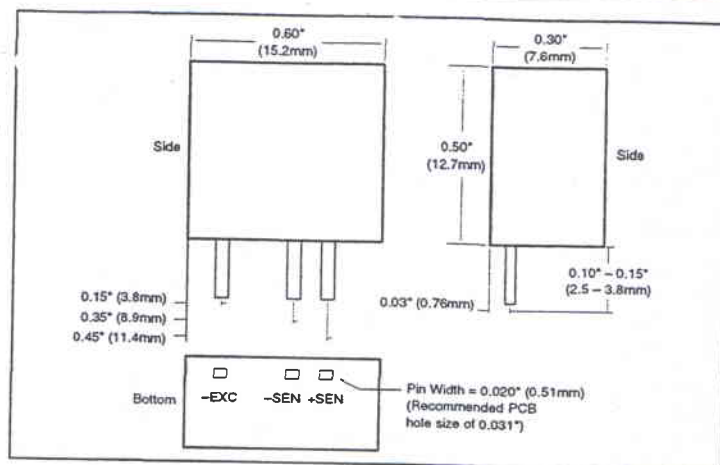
OMX-CJC-C Physical Dimensions And Pin Layout.
